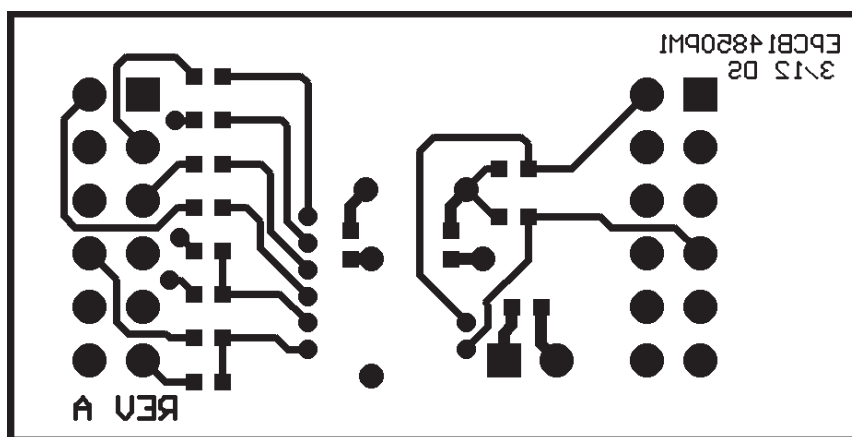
MAX14850PMB1 Peripheral Module PCB Layout—Solder Side
